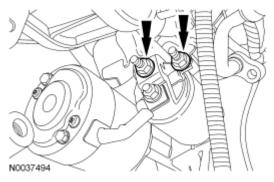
Locating Starter Wire Nuts Courtesy of FORD MOTOR CO.
